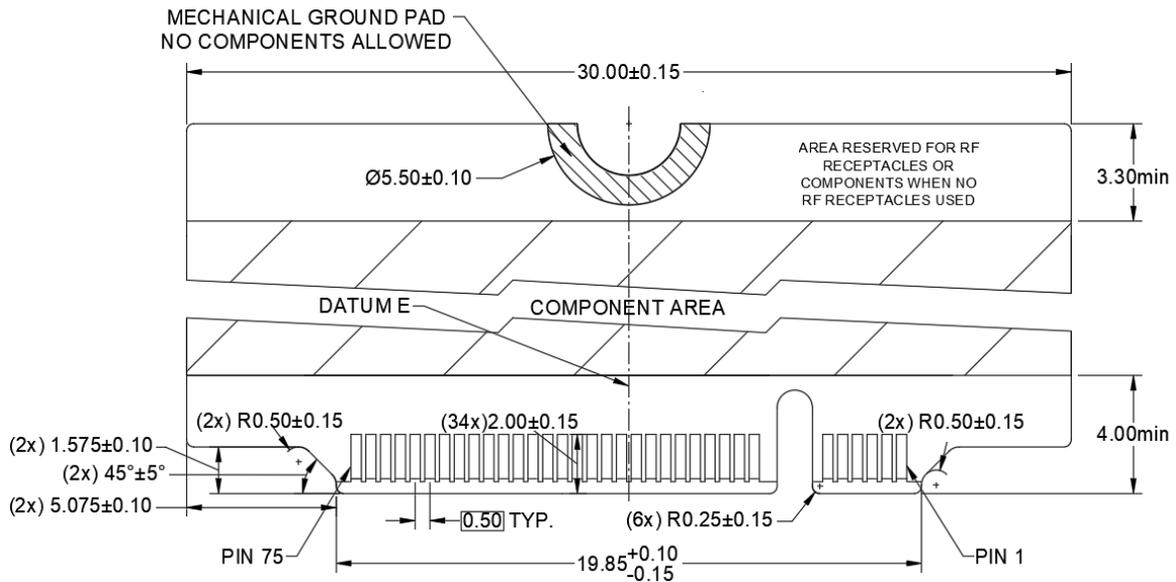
M.2 30XXX-XX-X-1A(D) Card Edge Outline Topside
